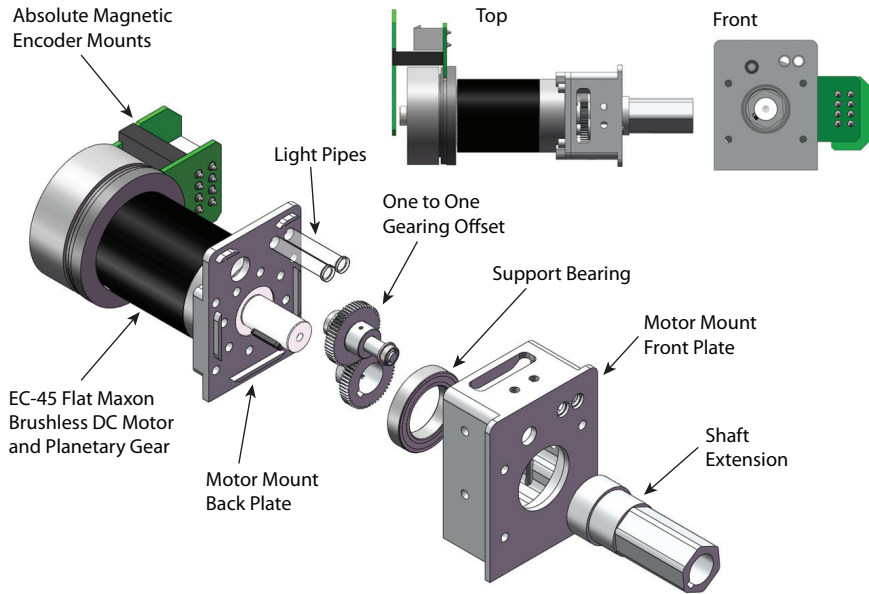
Exploded view of the motor mounting assembly (leg and leg mount not included).
